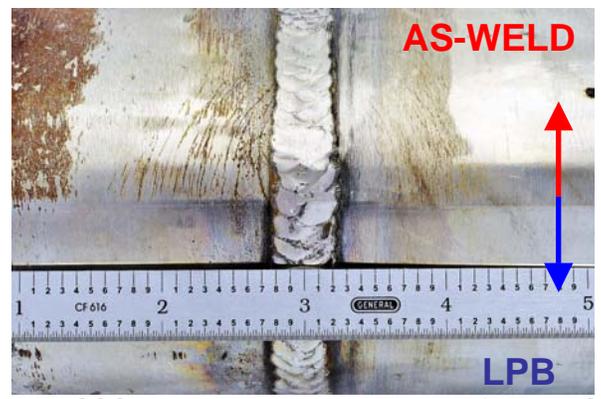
SCC cracking on un-treated side of a 304L SS pipe weld specimen.
